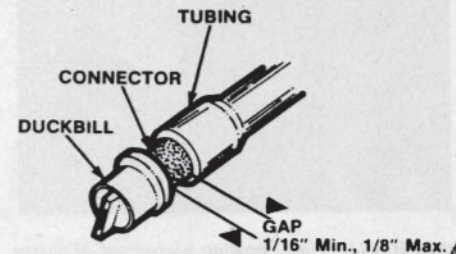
A—Gap between duck bill valve and tubing end must be 1/16-1/8 in.
